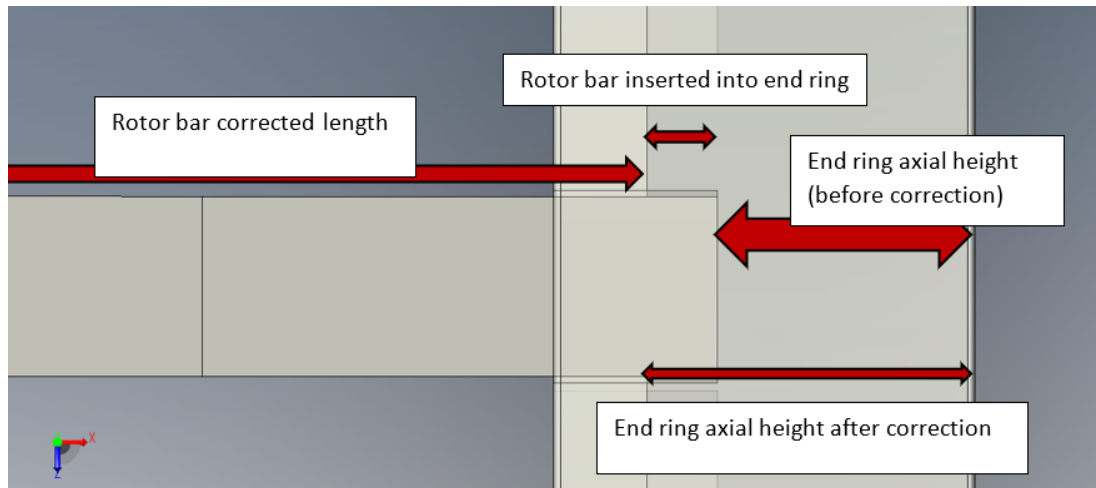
2D Schematic of the Rotor Bar and Rotor End Ring Connection of the Actual Motor
